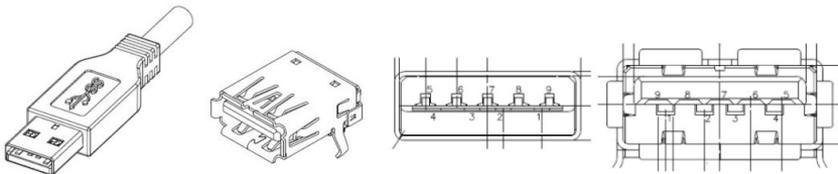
USB3.0 A type USB plug (left) and socket (right)
